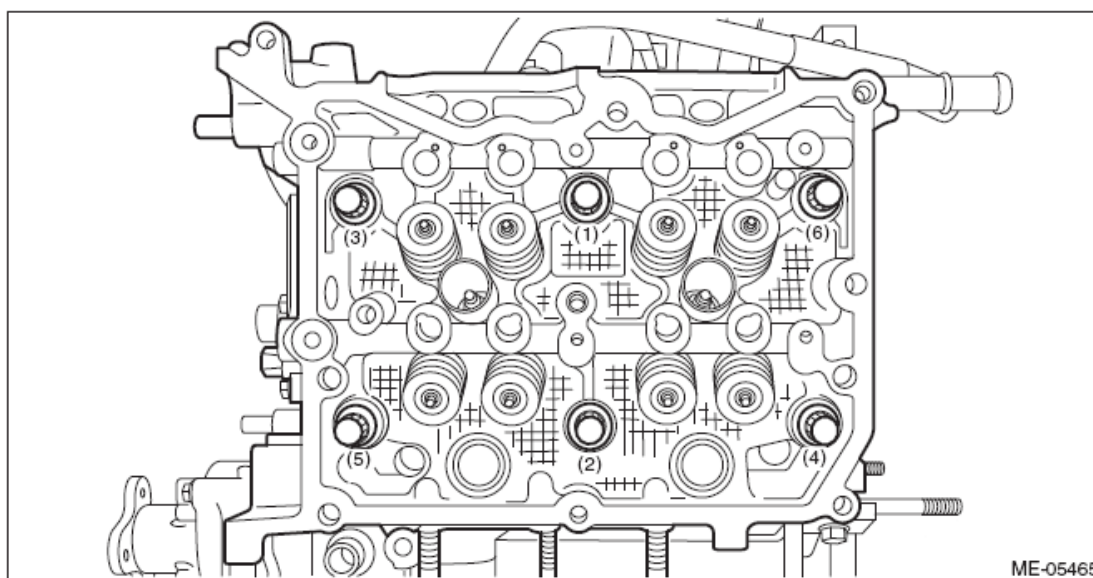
Identifying Cylinder Block Bolts Tightening Sequence
